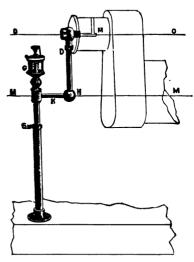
Oiler Arm Complete, with Floor Stand and Oil Cup.
